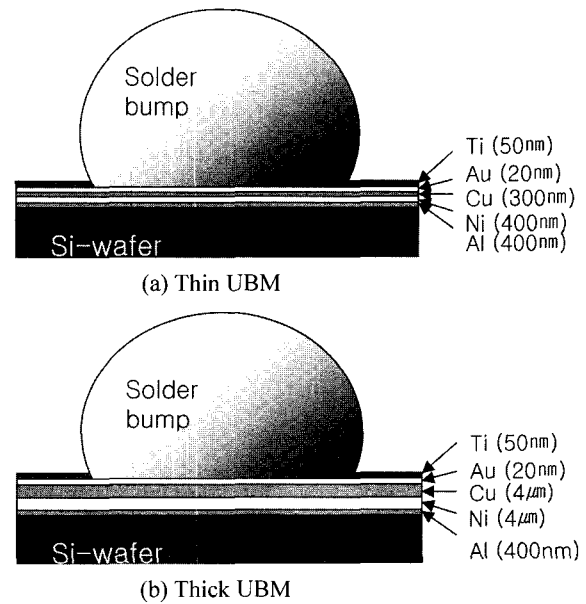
Schematic illustration of soldered specimens UBM layer.
